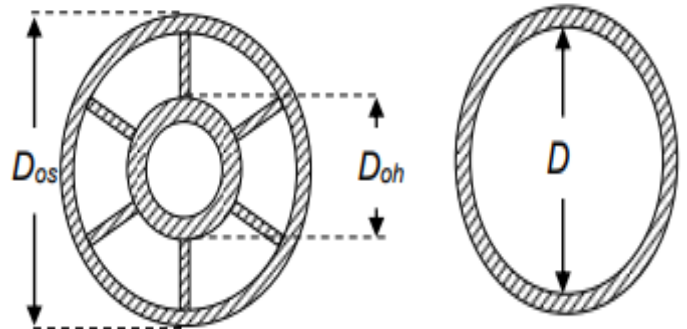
A shows the front view of the co-axial swirl device; Fig. 3B shows the free jet or nozzle device;
